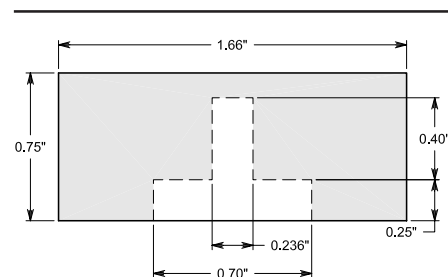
Dimensions for boring the holes in the brass lathe stock.
